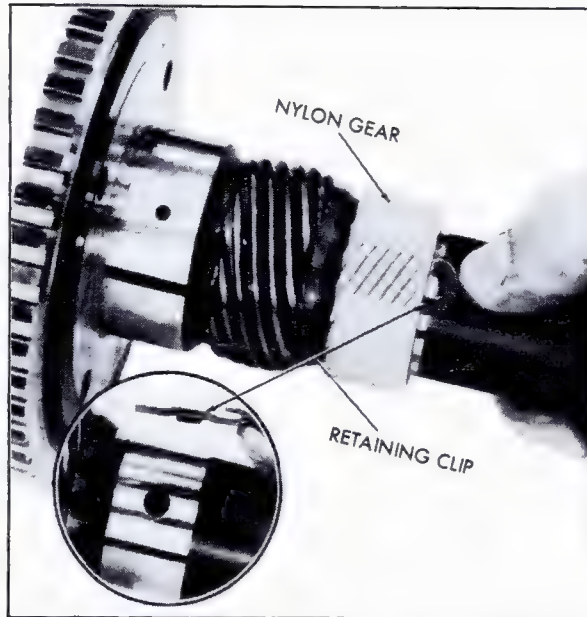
Removing and Installing Nylon Speedometer Drive Gear
